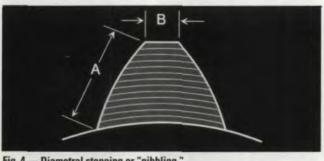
Diametral stepping or "nibbling." 48 GEAR TECHNOLOGY roaching is a process in which a cutting tool passes over or through a part piece to produce a desired form.A broach removes part material with a series of teeth, each one removing a specified amount of stock.
